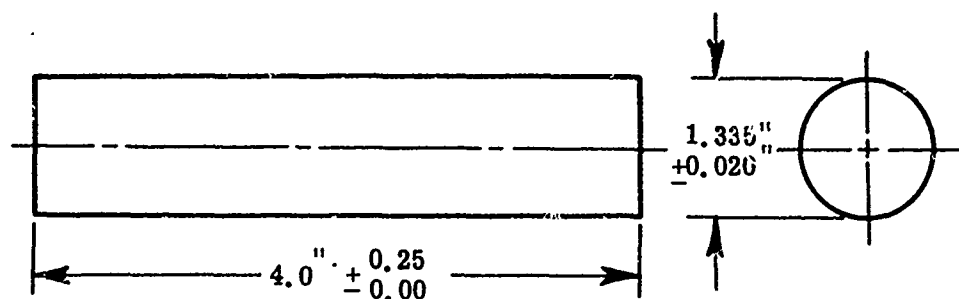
Configuration of Specimen Blank 1831-A-13 as received from Coors and Cutting Plan for Removing Phase I Macro Tensile and Macro Flexural Specimens
